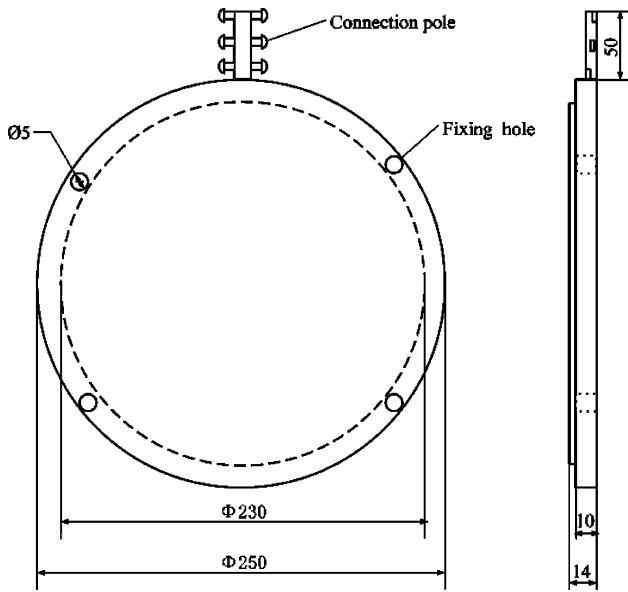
Sketch of the assembled side-piece of the coil (scale: mm).
